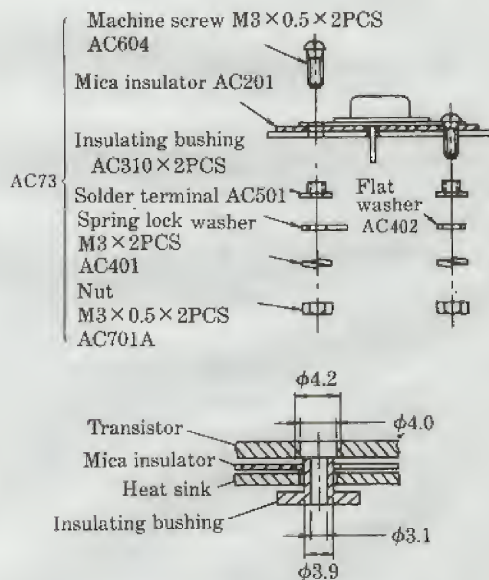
Mounting transistor TO-3 (2-21D1A) on a heat sink
